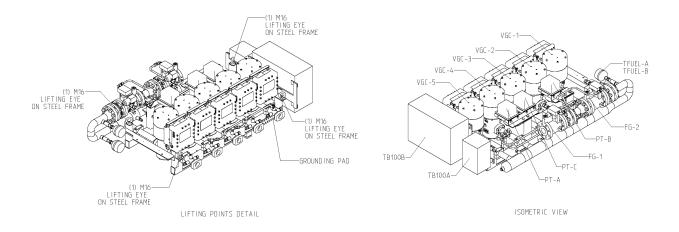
Standard Woodward GS40 (Aluminum Body) Gas Fuel Skid Isometric View
